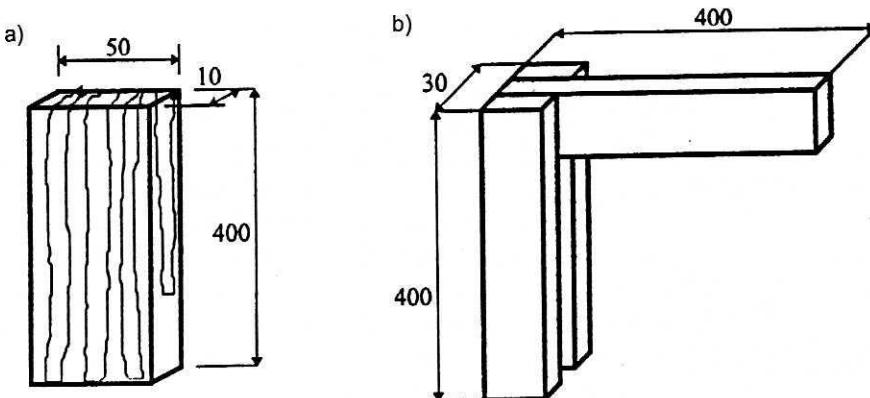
Shape and dimensions of flat angle joints used for experiments
